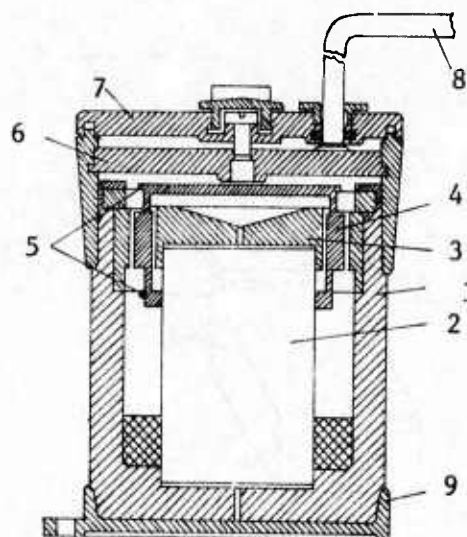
Schematic drawing of the OSP-1 seismometer [6]
